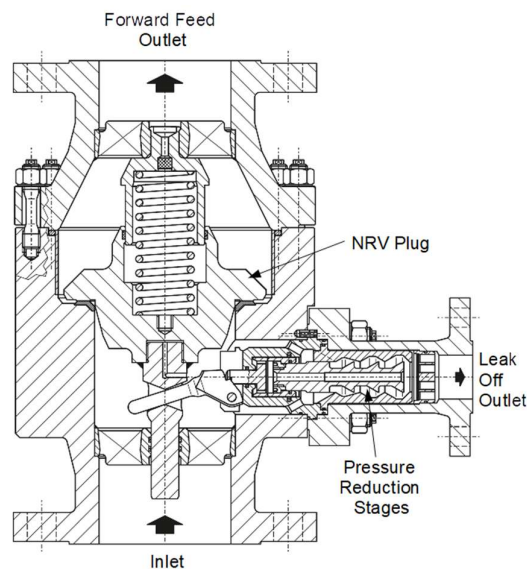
ARC type valve section drawing (Desensitised from undisclosed source)
